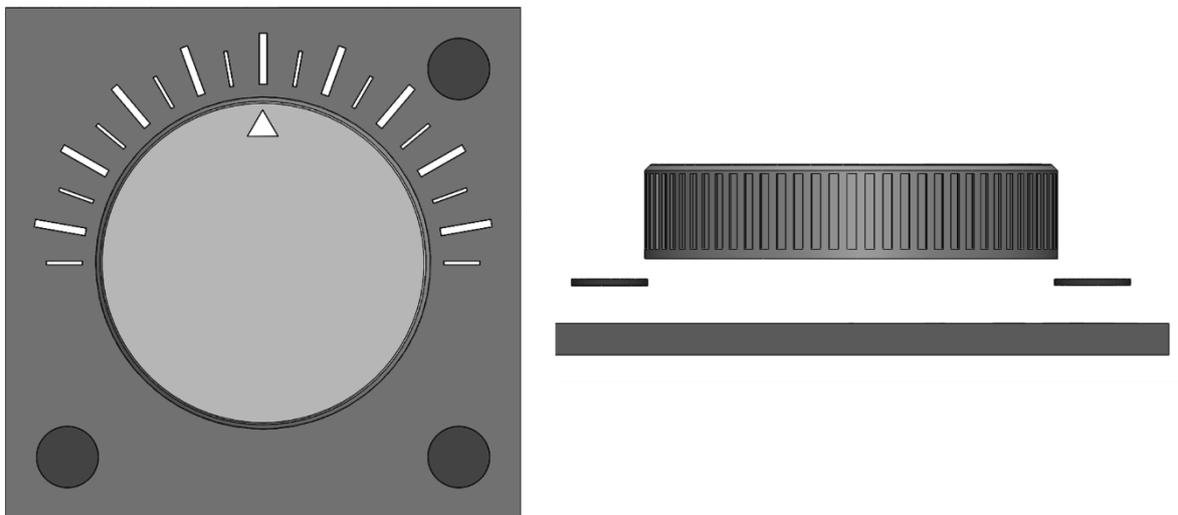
Left: Rudder controller top view, displays three buttons. Right: Speed lever exploded view displaying main components.
